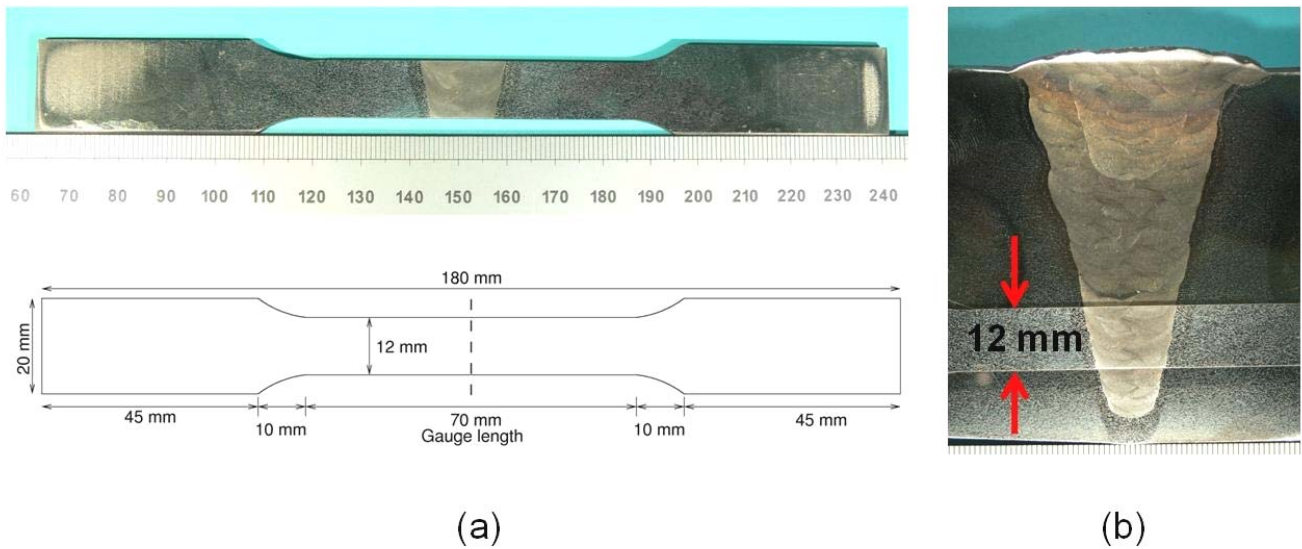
(a) The cross-weld tensile specimen and its dimensions (b) cut position of the specimen with respect to the girth weld.
